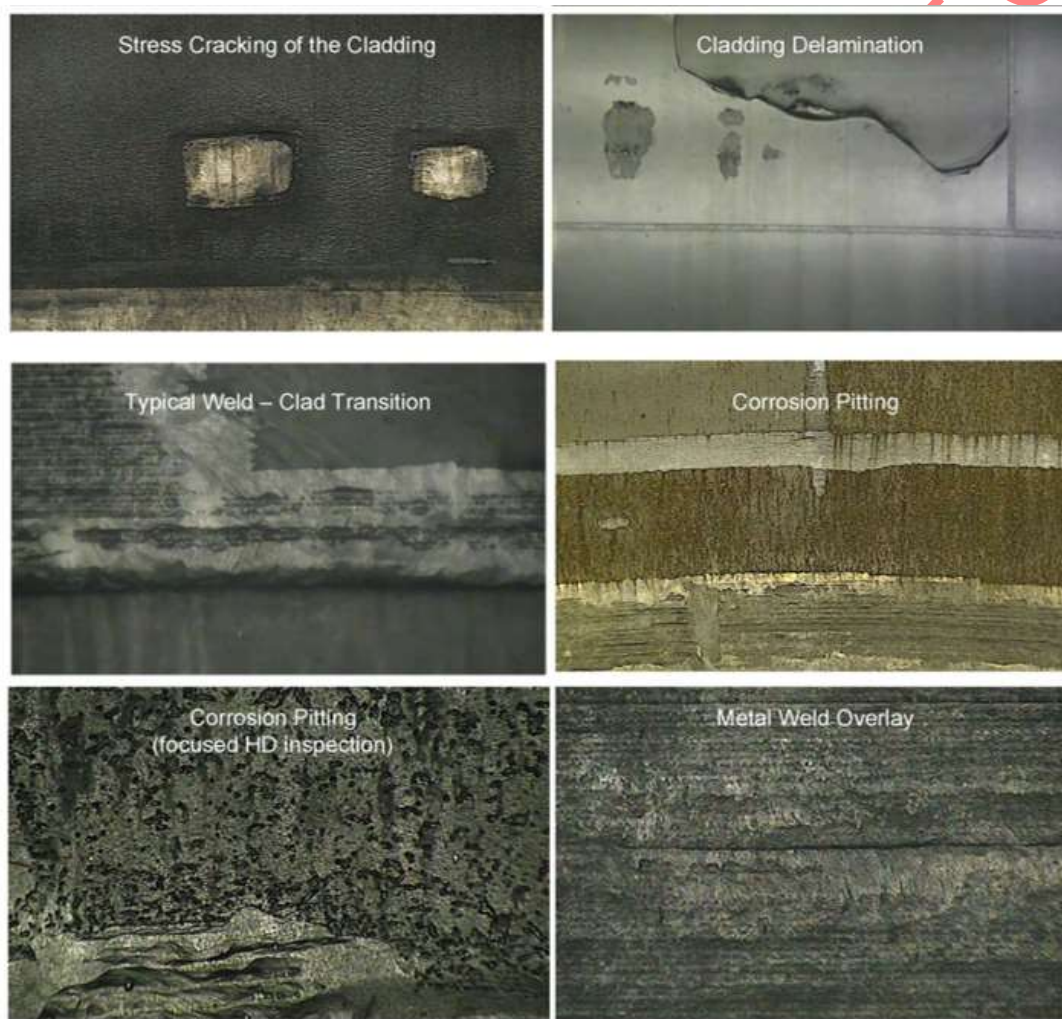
Video Camera Photos Show Internal Damage in Coke Drum
